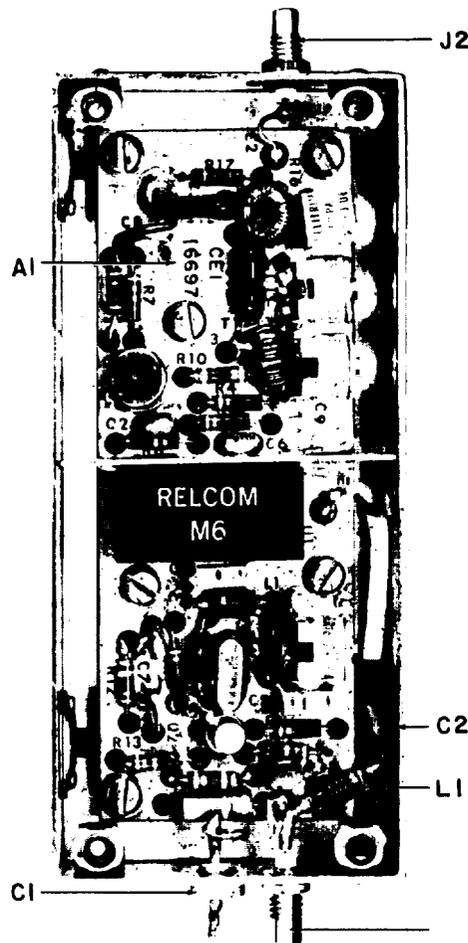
Type 71347-4 60/21.4 Converter Assembly (A3), Location of Components
